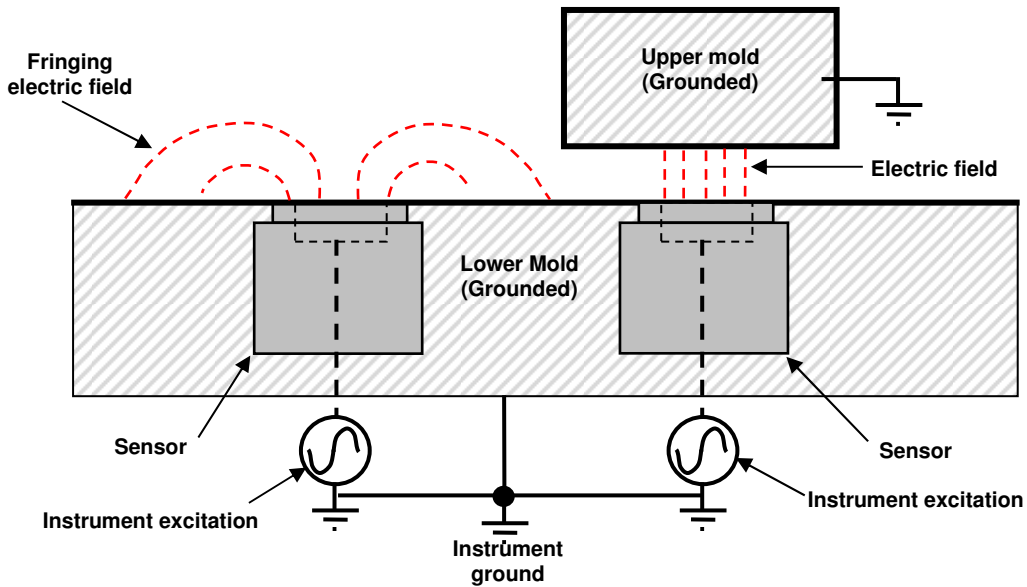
shows how a 1-inch Single Electrode sensor would be installed in a press or mold.
